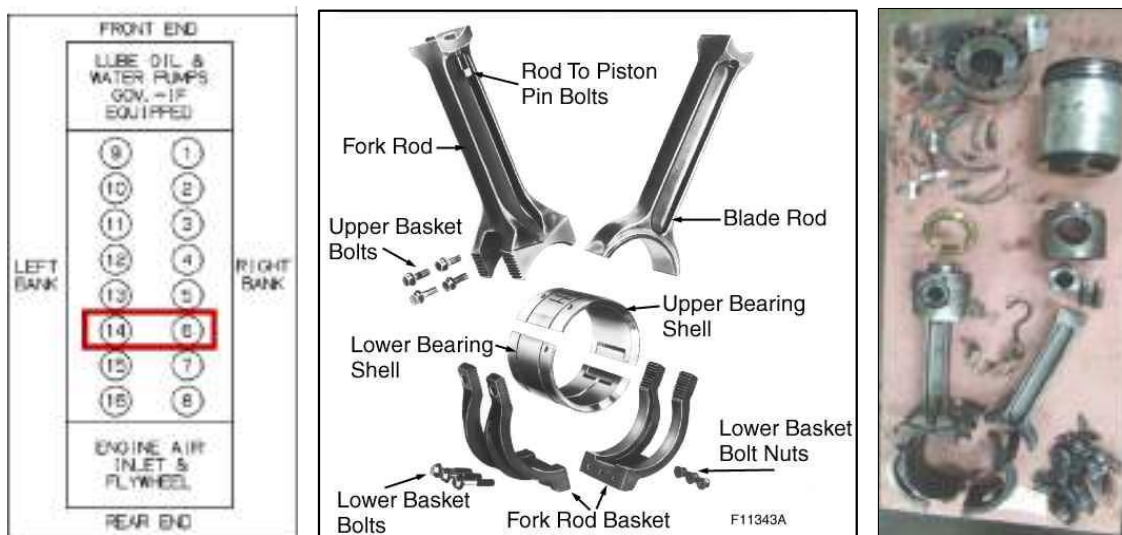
Left: EMD 710 cylinder arrangement showing the affected area in red. Center: EMD 710 connecting rod arrangement. Right: Damaged components recovered from no. 3 main engine no. 6 and 14 cylinders. (Source: Dynamark Engineering)
